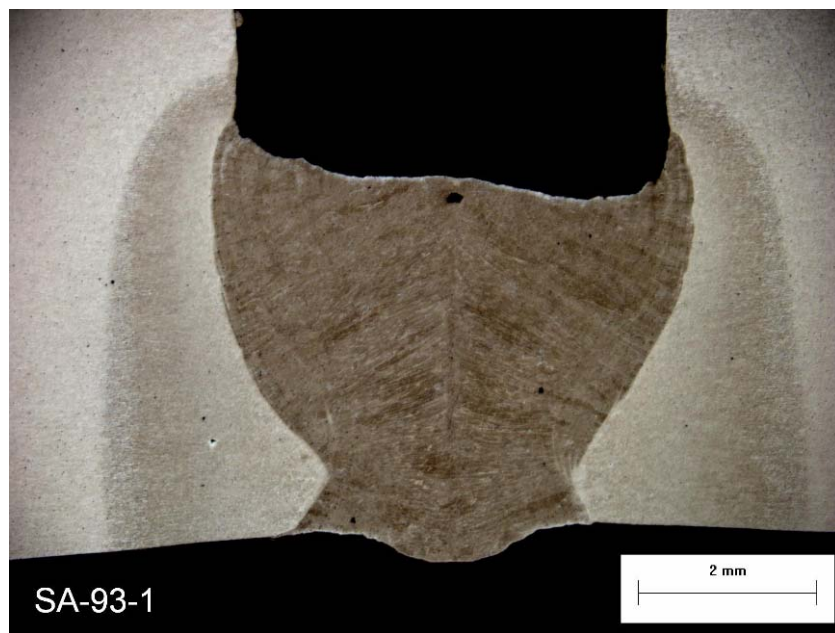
Macrosection of Weld SA-93 Showing Good Fusion Profile (Wire feed speed/travel speed ratio: 12., throat thickness: 4 mm, travel speed: 0.7 m/min, magnification: 14×.)
